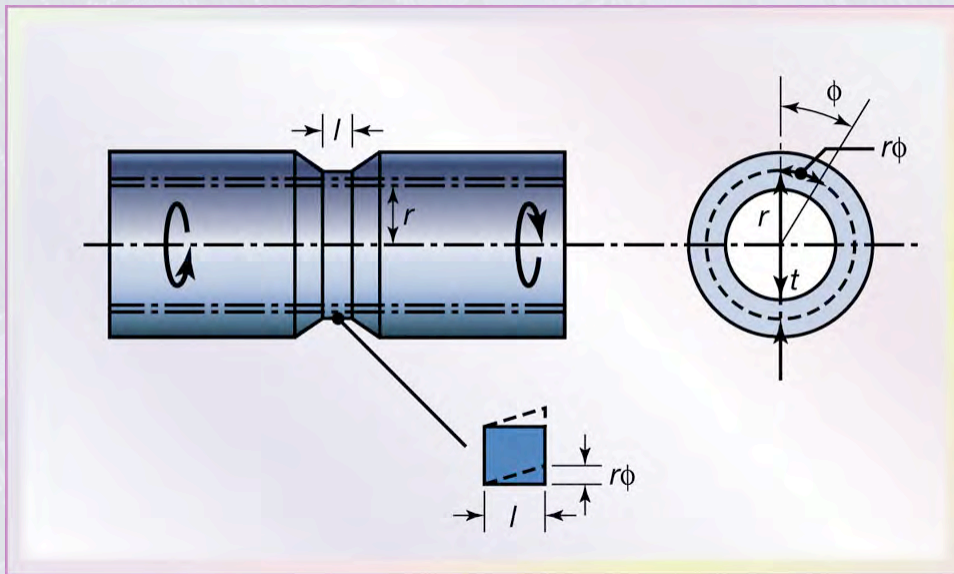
A typical torsion-test specimen; it is mounted between the two heads of a testing machine and twisted. Note the shear deformation of an element in the reduced section of the specimen.
